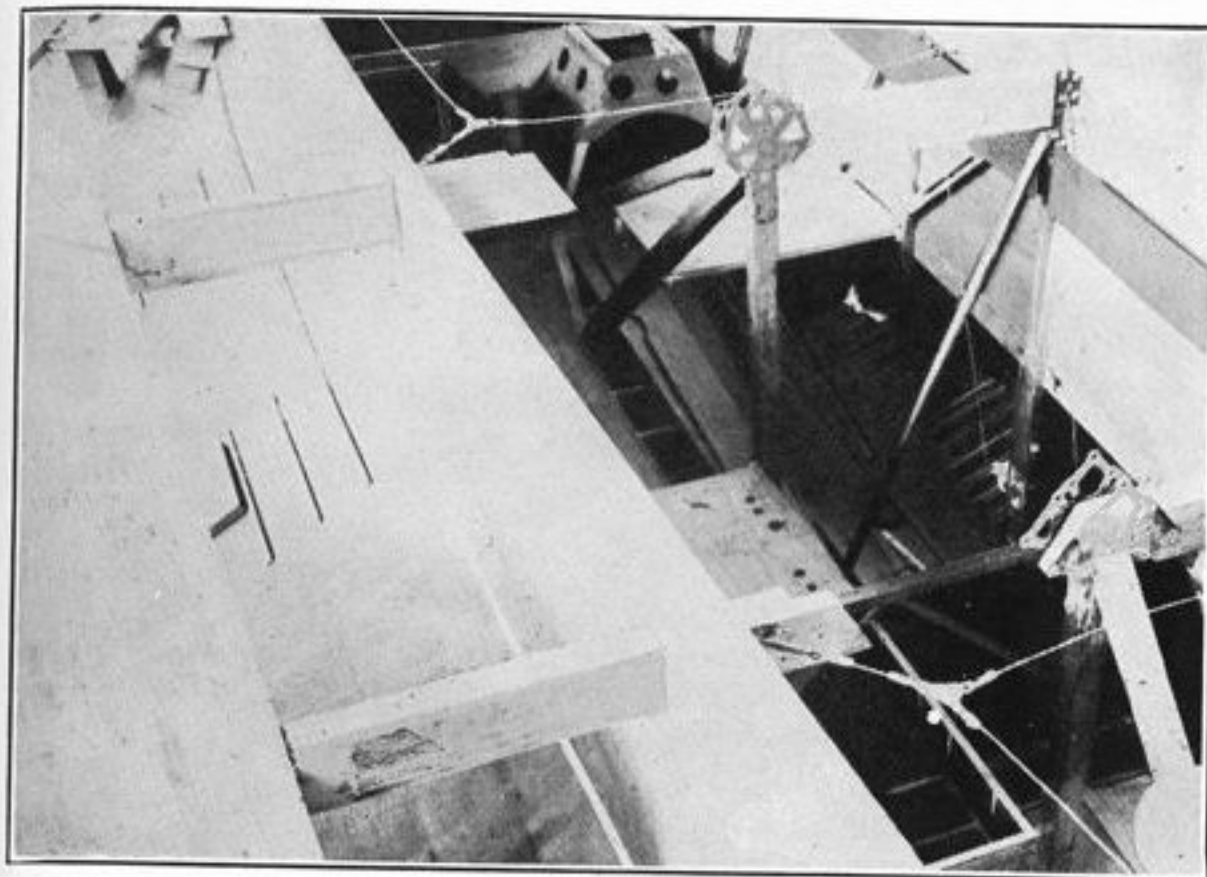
DETACHABLE SIDEWALK PANEL PARTLY REMOVED. LOOKING FORWARD.
